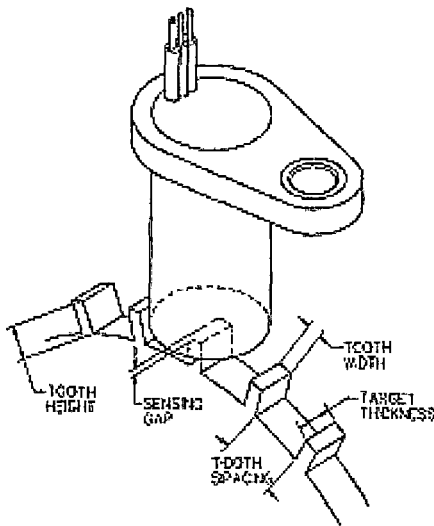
Hall effect sensor in relation to gear tooth wheel.
